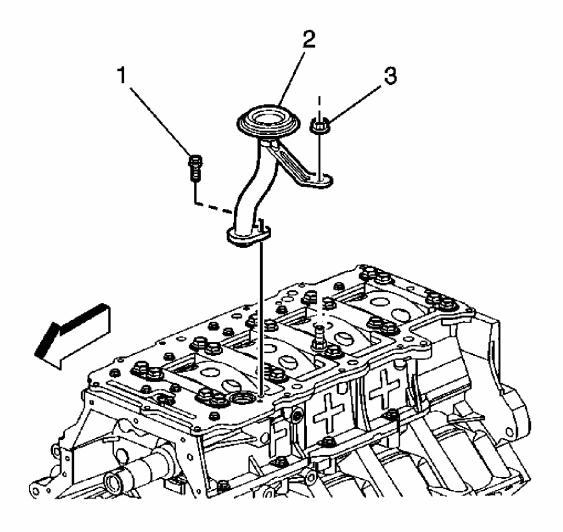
Identifying Oil Pump Pickup Tube Support Nut, Oil Manifold Mounting Bolt & Oil Pump Pickup Tube Courtesy of GENERAL MOTORS CORP.
